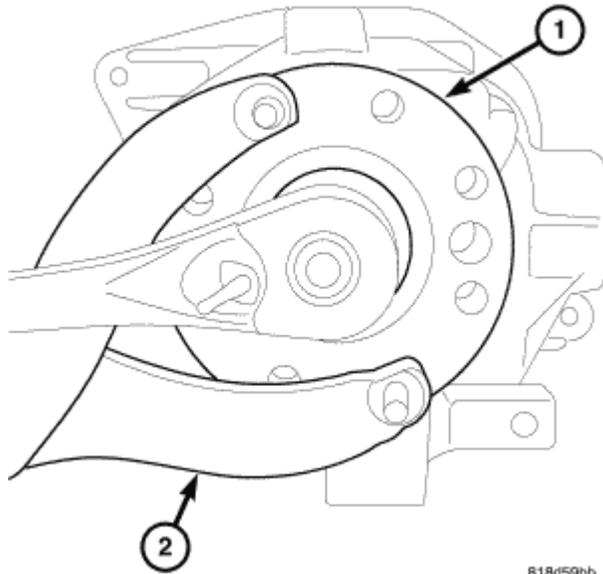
Holding Pinion Flange With Flange Holder C-3281
